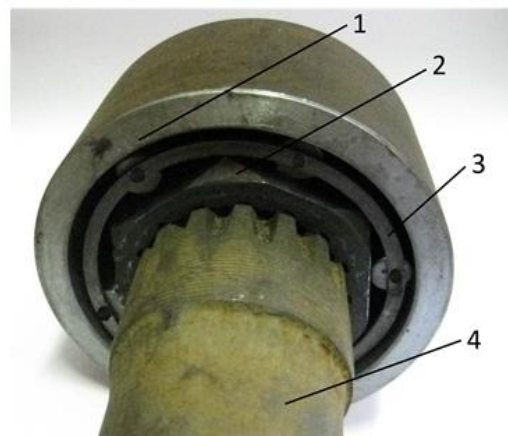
General view of the differential lock: 1 – outer ring; 2 – sprocket; 3 – cage with rollers; 4 – the axle shaft
